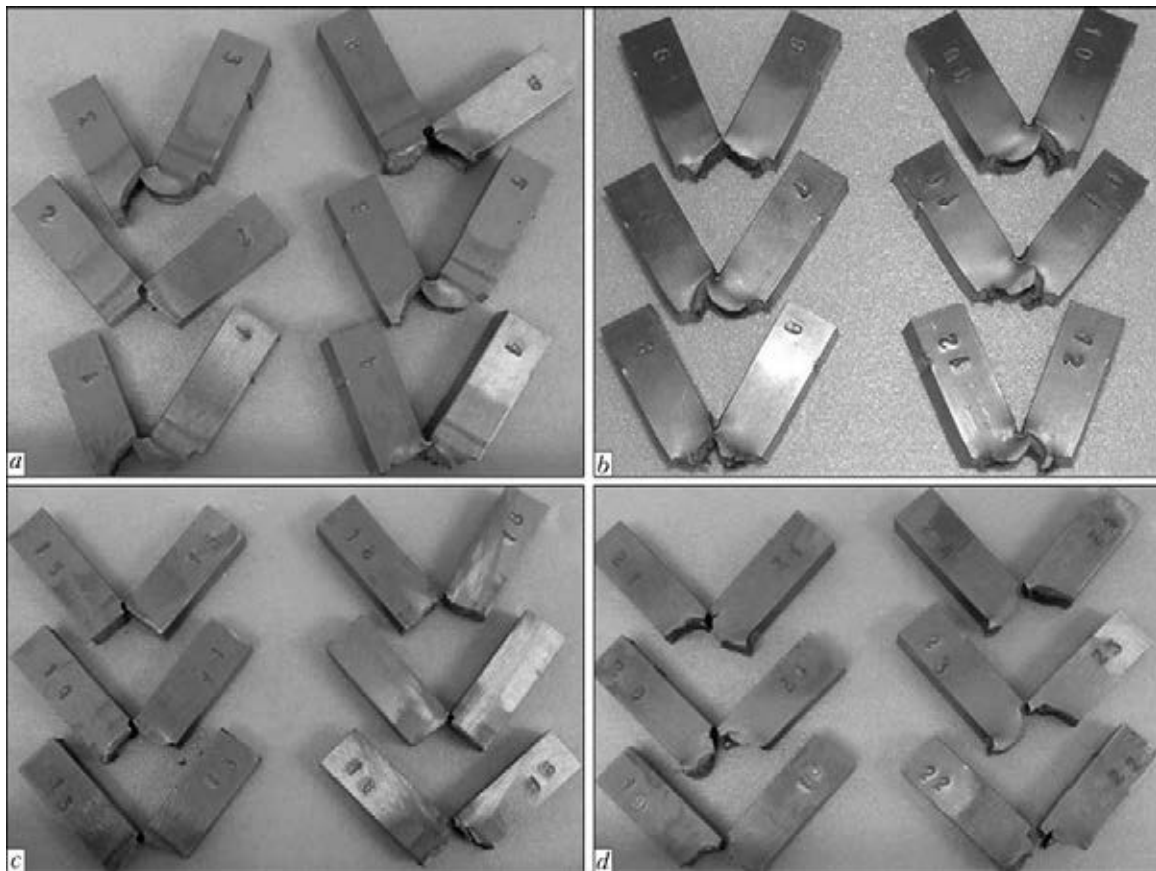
Specimens after mechanical tests on impact toughness of welded joints of heat-resistant steel 10Kh12M (*a, b*) and steel 10Kh9MFBA (*c, d*): *a* – after EBW (1–3 – bending along the weld axis; 4–6 – bending along the fusion line); *b* – after EBW and next tempering (7–9 – bending along the weld axis; 10–12 – bending along the fusion line); *c* – after EBW (13–15 – bending along the weld axis; 16–18 – bending along the fusion line); *d* – after EBW and next tempering (19–21 – bending along the weld axis; 22–24 – bending along the fusion line)
